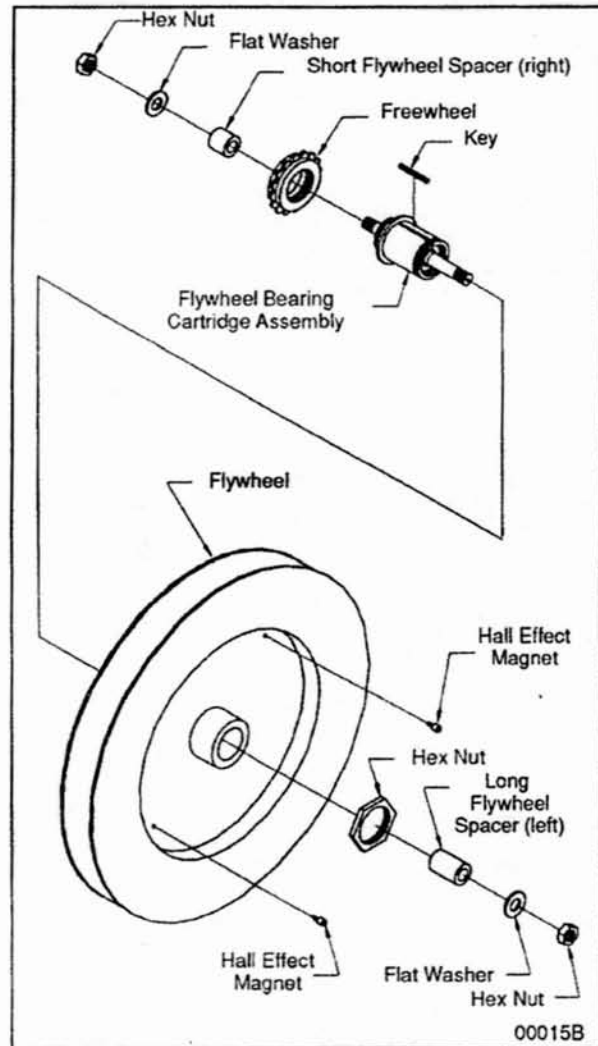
Flywheel Bearing & Spacer Replacement.
